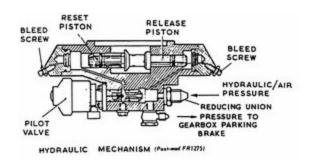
Mk 20 hose-drum brake hydraulic mechanism
